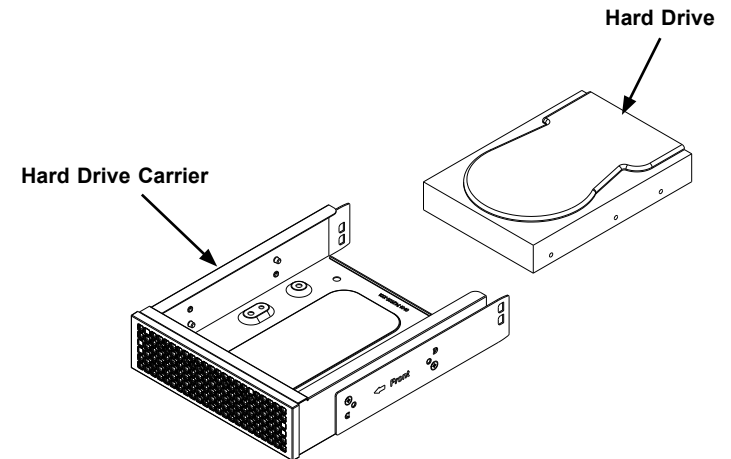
Adding a Hard Drive to the Drive Carrier
